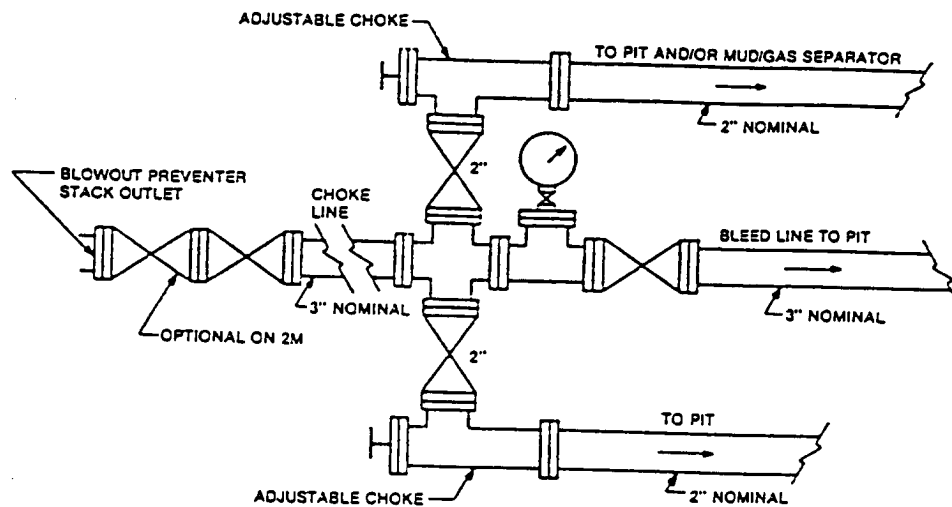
Typical choke manifold assembly for 2M and 3M rated working pressure service — surface installation.
